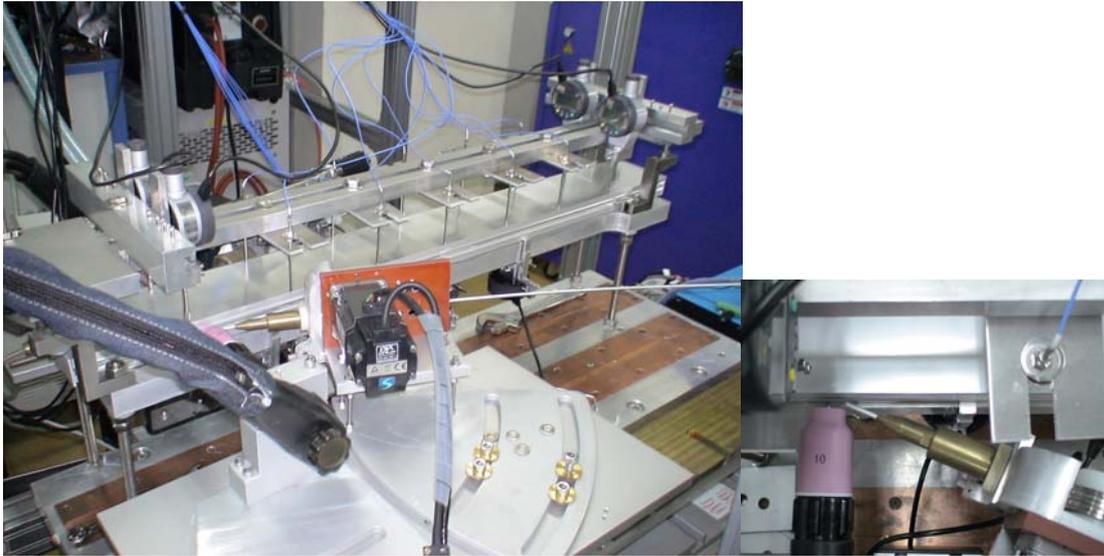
Two-axis welding system with two TIG torches, and real-time monitoring sensors.
